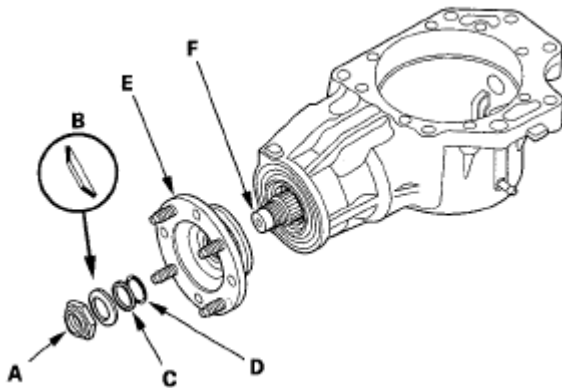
Identifying Locknut, Conical Spring Washer, Back-Up Ring, O-Ring And Companion Flange
